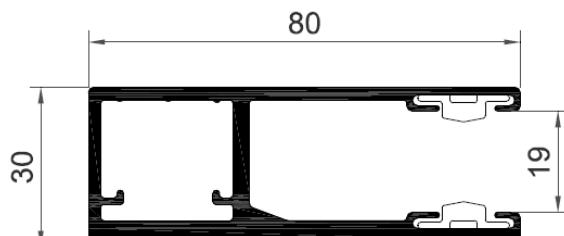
Cross-section side guide (PPW80) with a bottom slat
